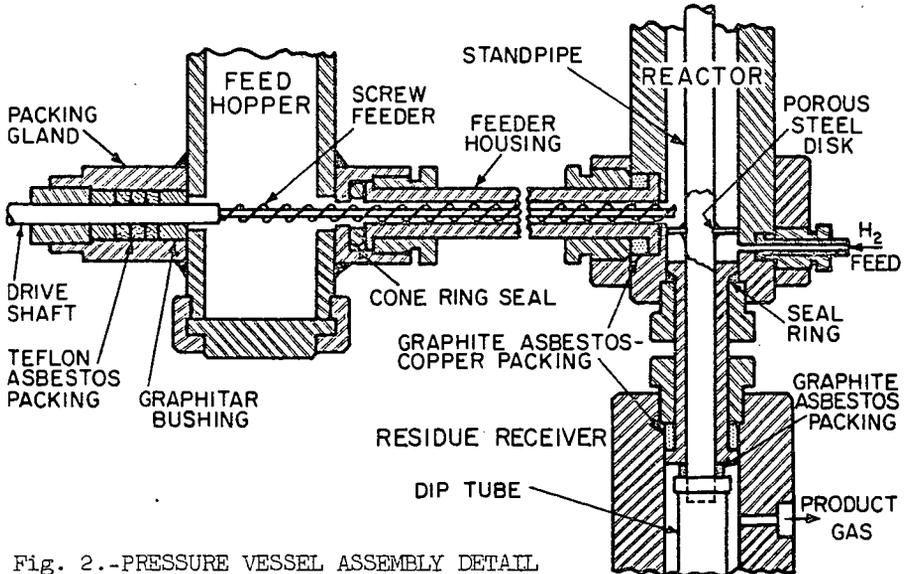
PRESSURE VESSEL ASSEMBLY DETAIL
